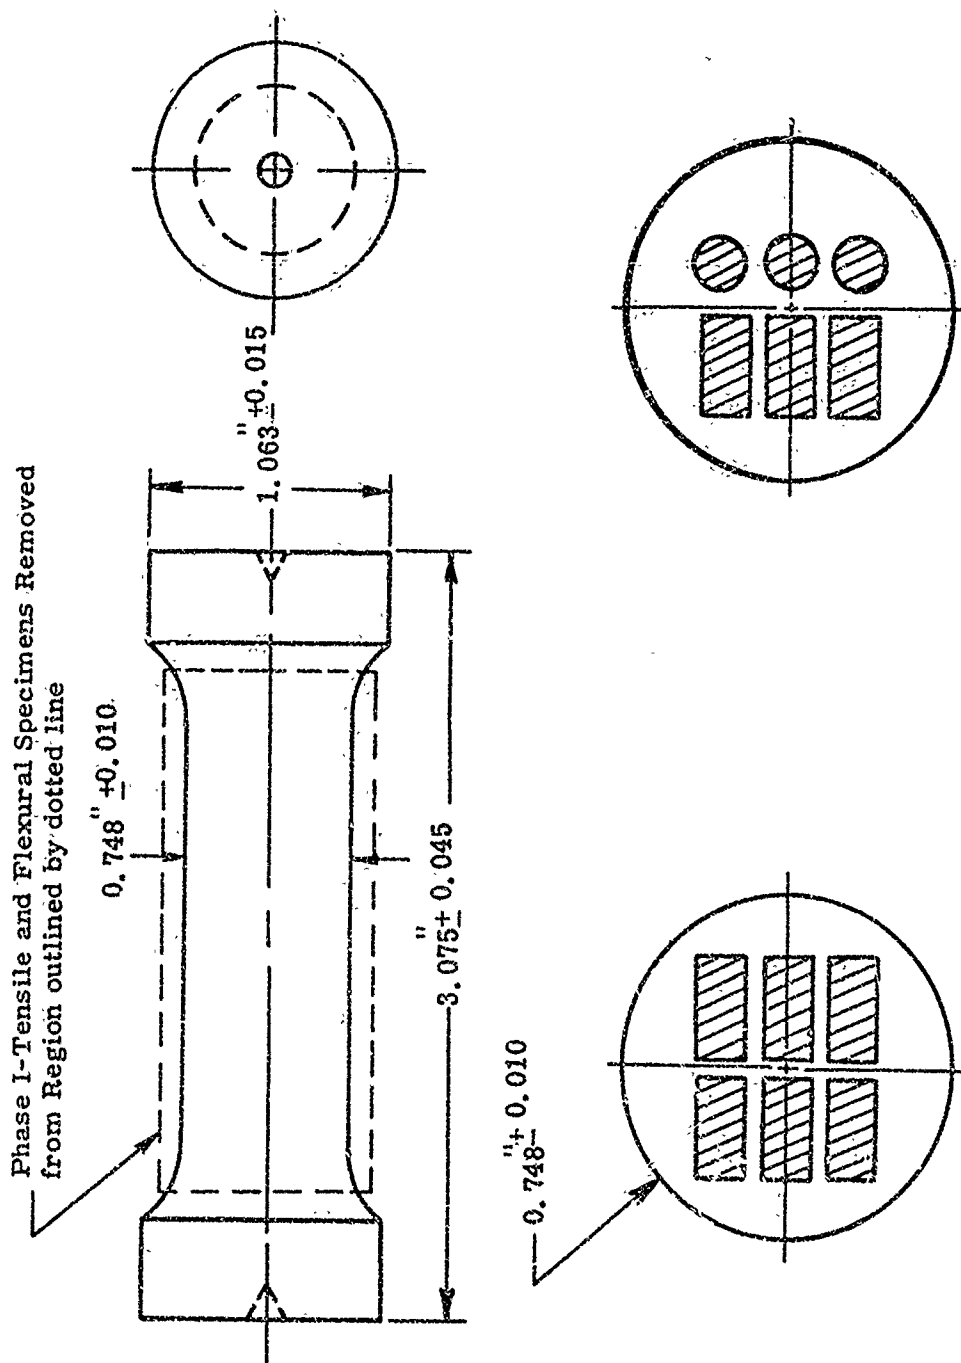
Configuration of Specimen Blanks 2A08 as Received from Coors and Cutting Plan for Removing Phase I Macro Tensile and Macro Flexural Specimens
